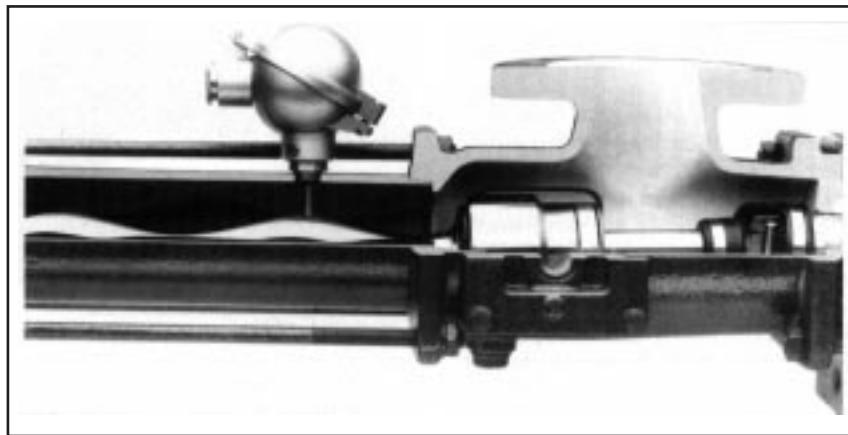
Thermistor imbedded in stator to protect against run-dry damage
